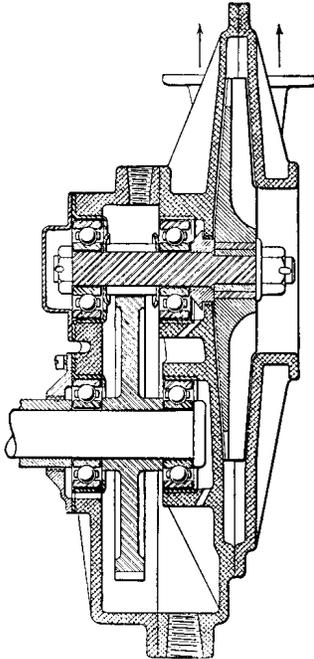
Section through Single-Stage Centrifugal Blower.
